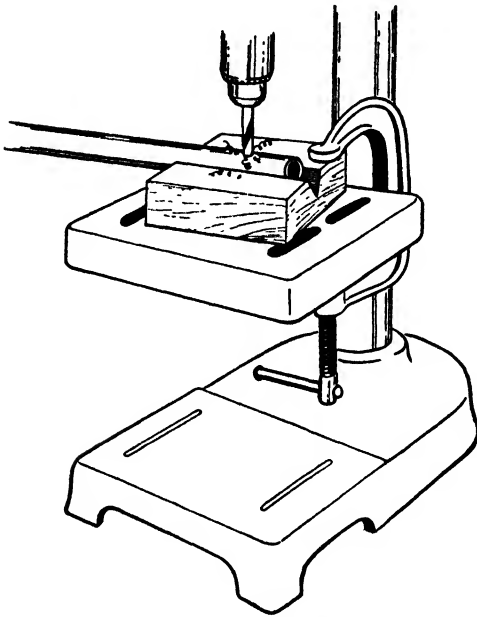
A V notch sawed in a block of wood is useful to keep round pieces from rolling on the drill table while holes are being drilled in them.
